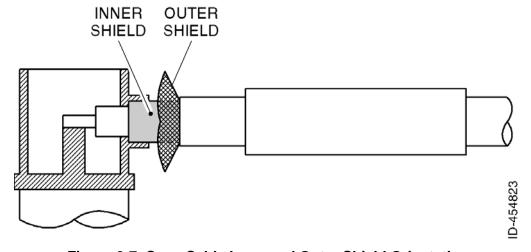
Coax Cable Inner and Outer Shield Orientation
